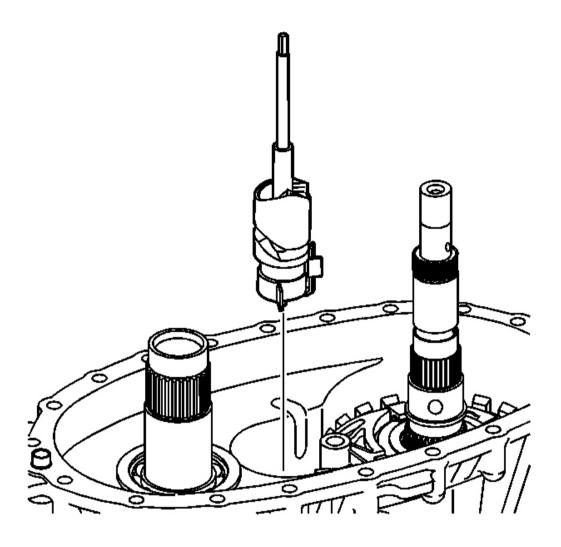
Shift Detent Lever Assembly Courtesy of GENERAL MOTORS CORP.
